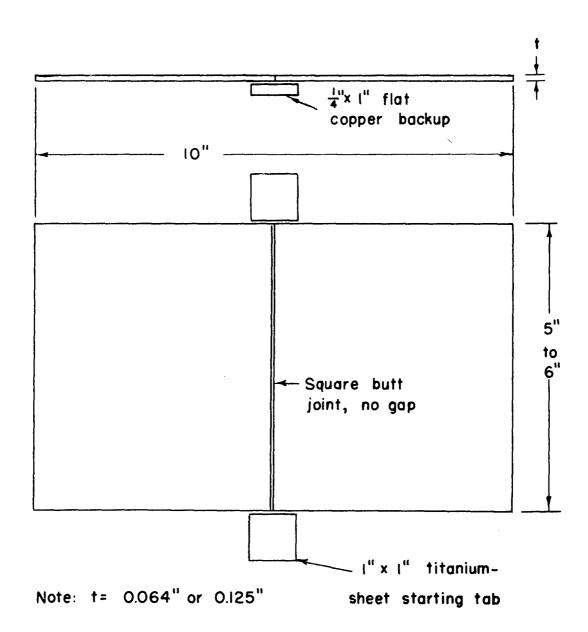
DETAILS OF SPECIMEN USED FOR ARC-WELDING TESTS
